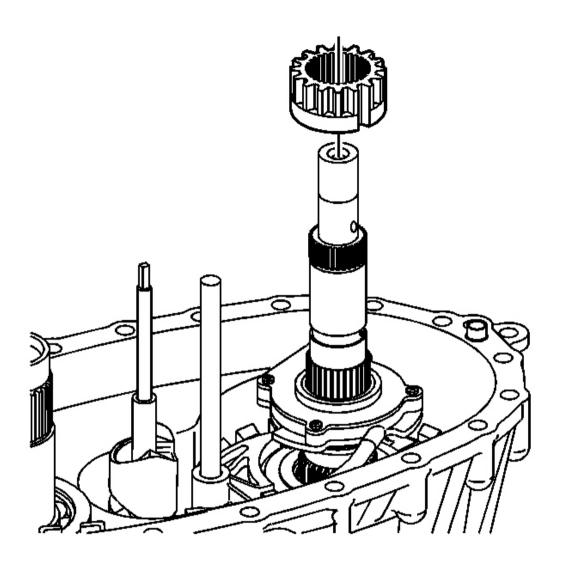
Inner Lockup Hub Courtesy of GENERAL MOTORS CORP.
